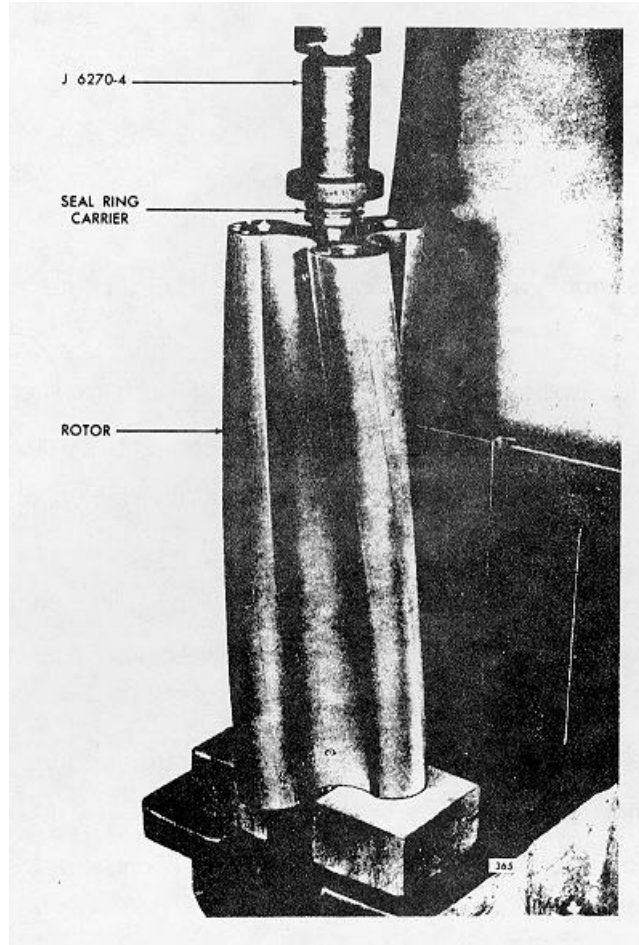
Installing Oil Sealing Carrier On Rotor.
